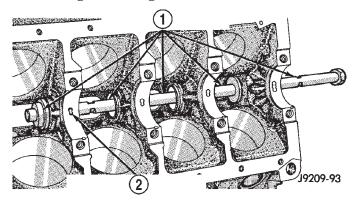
Camshaft Bearings Removal/Installation with Tool C-3132-A
